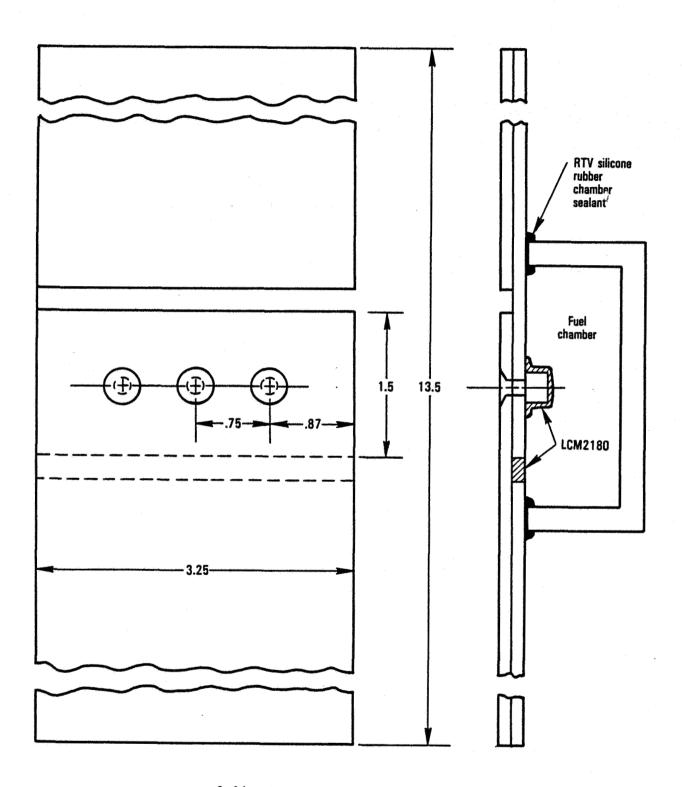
Fuel Sealing Lap Joint Geometry.
